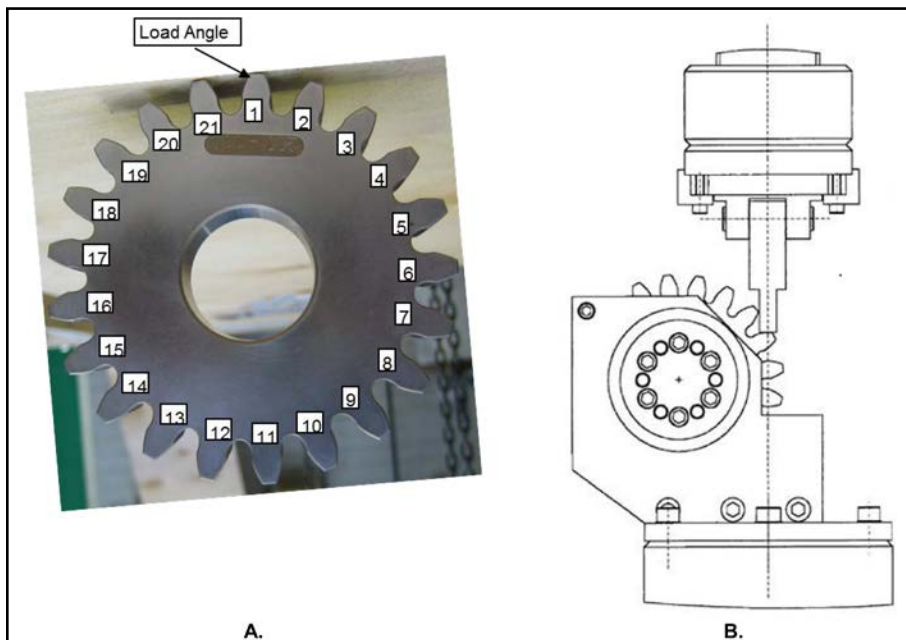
Machined spur gear with numbered teeth for testing showing the loading angle (A), and the testing fixture showing the loading gear tooth in the cyclic R=0.1 loading condition (B).
